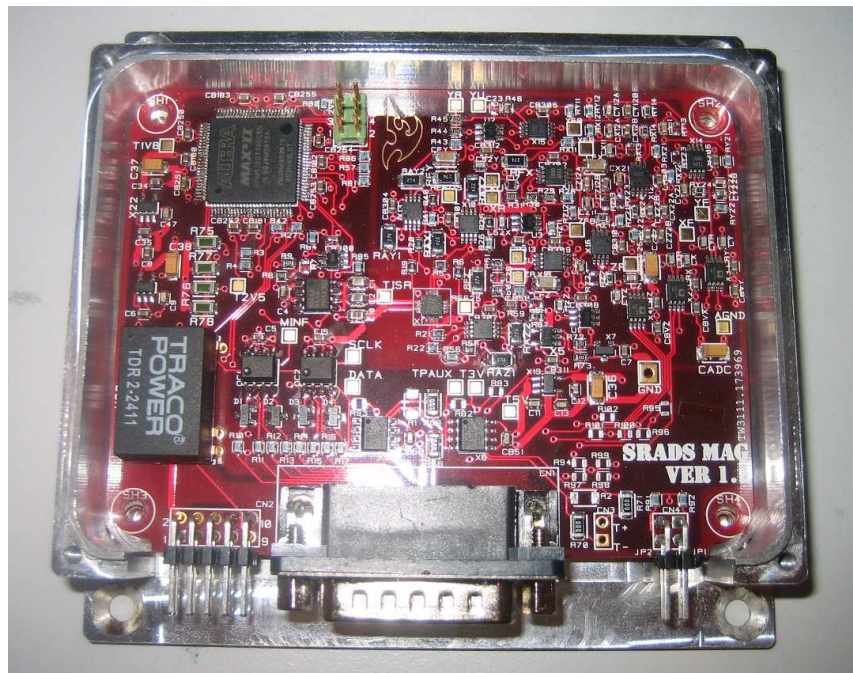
The bottom part of the instrument housing, containing one instrument PCB.
